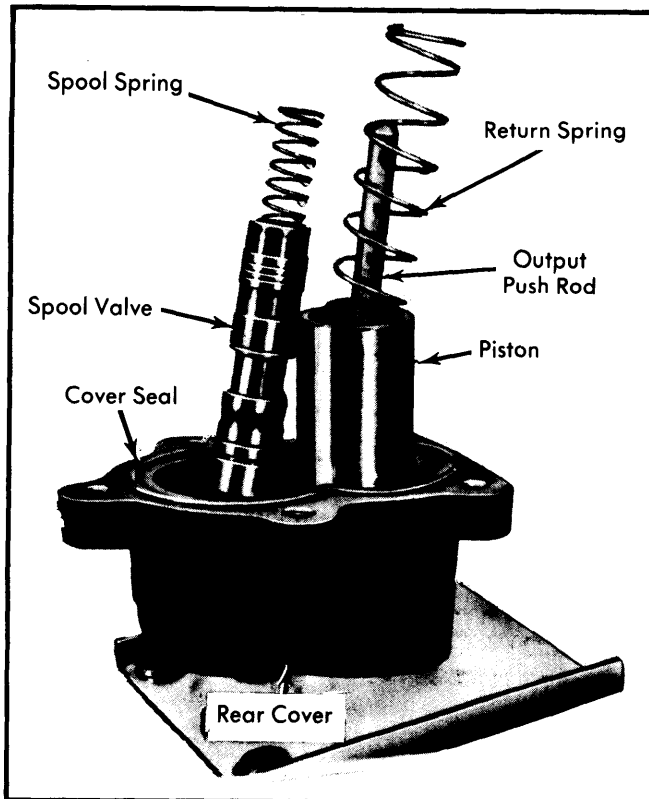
Booster Rear Cover Assembly Showing Spool Valve and Power Piston (Cadillac Shown)
